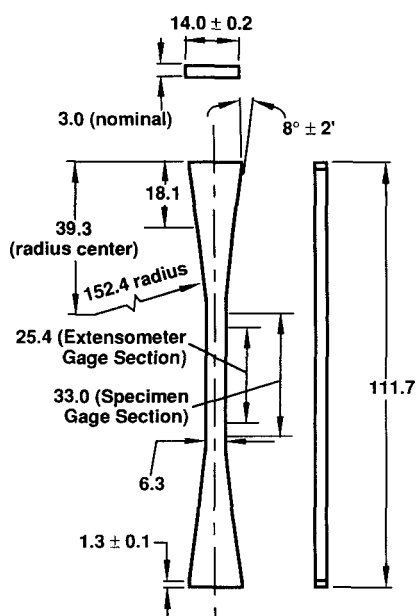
Edge-loaded test specimen geometry. All dimensions in millimeters.
